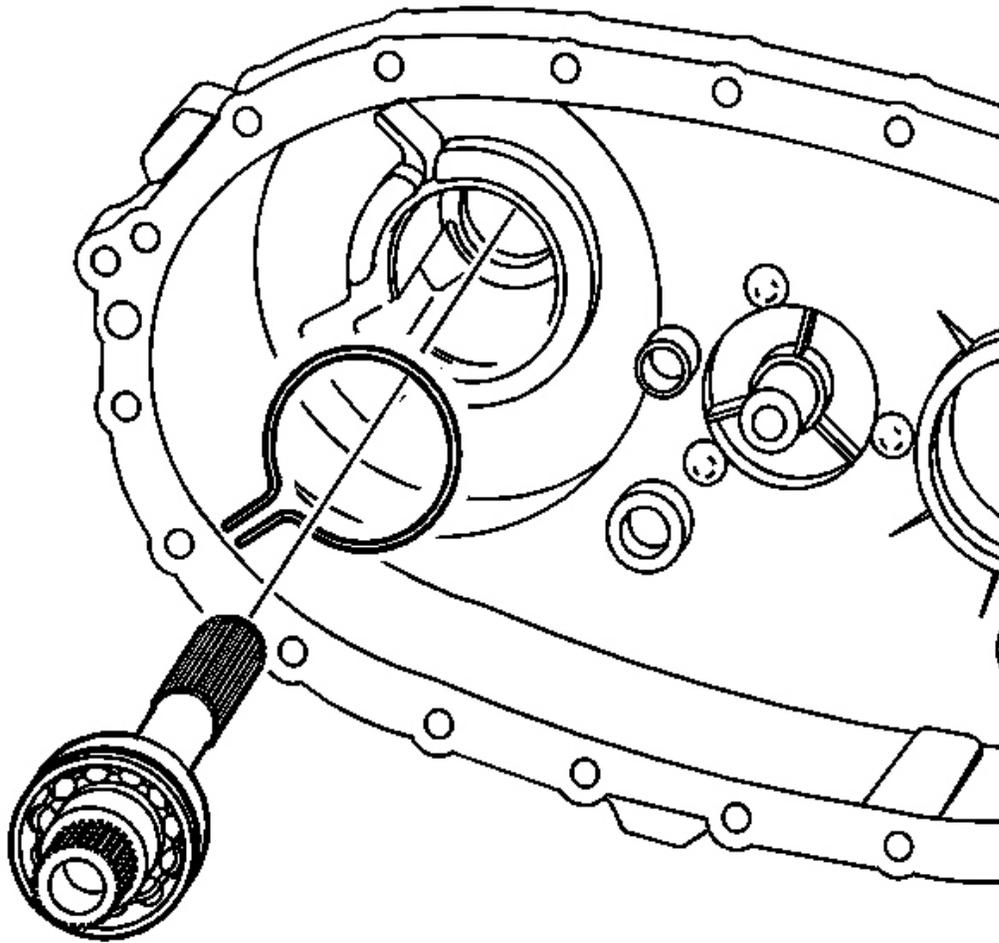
Identifying Rear Output Shaft & Outer Retaining Ring
